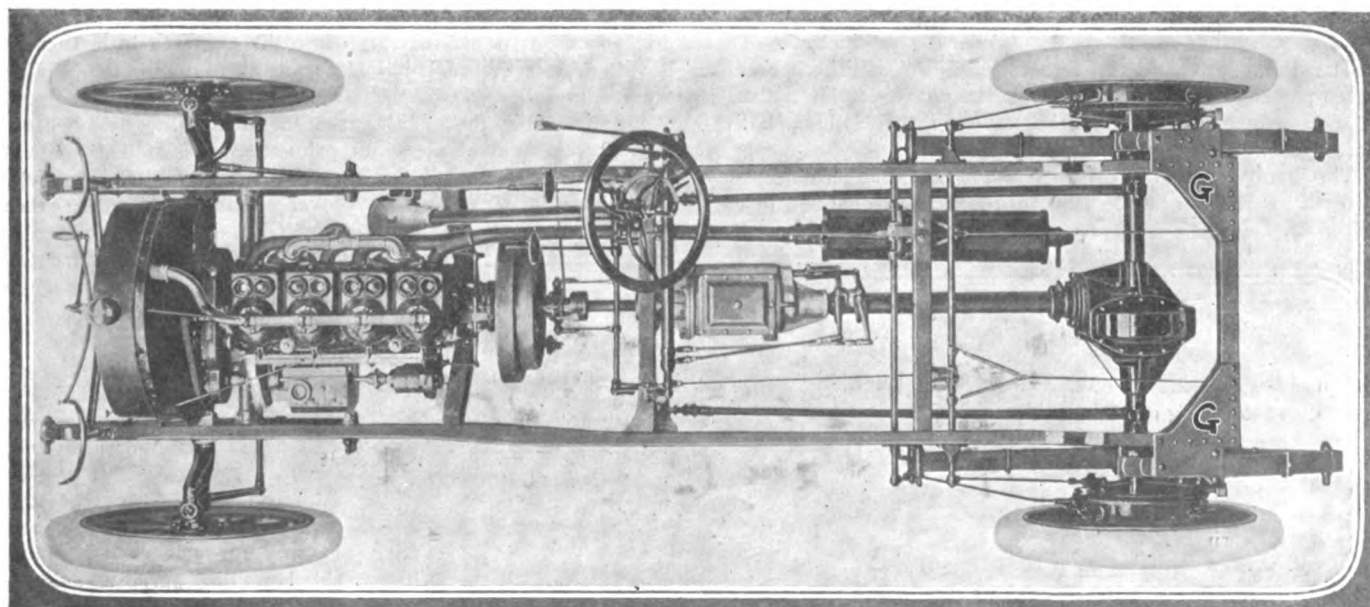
Plan view of the Rambler chassis, showing the co-relation of the various units
